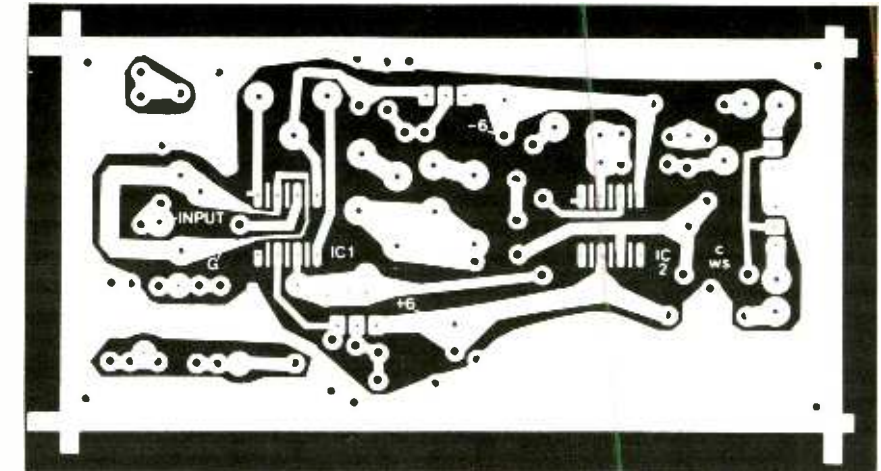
The actual-size etching-and-drilling guide for the printed-circuit board to be used in this project.
